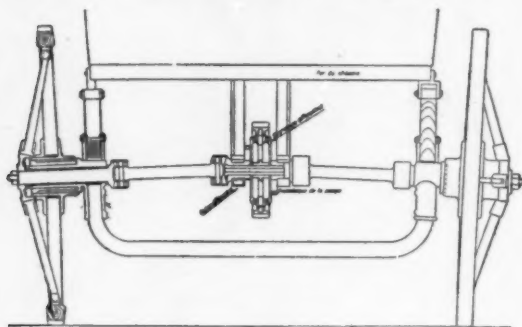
Arrangement of Driving-wheel Gear of the de Dion and Bouton Power Carriage
